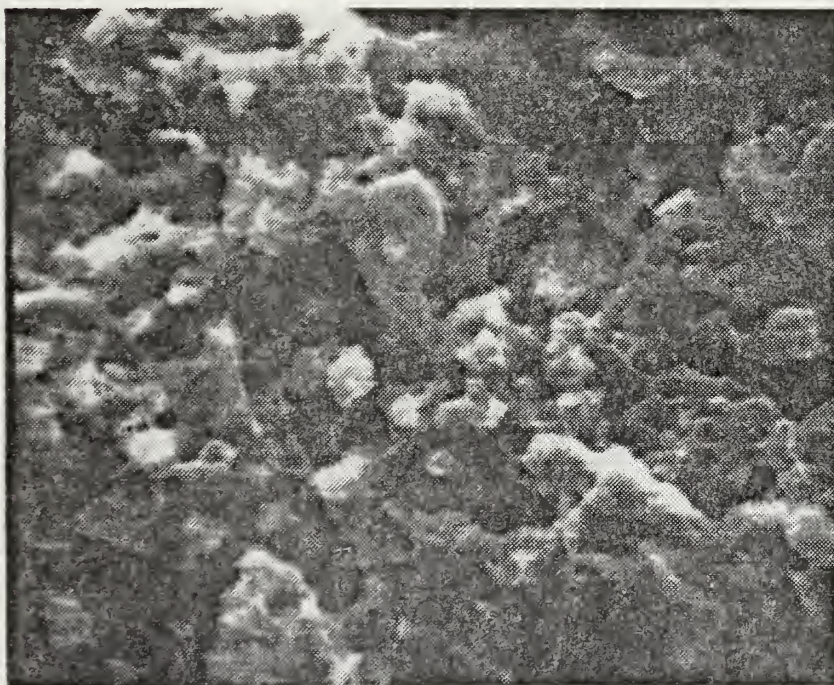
Higher magnification view of the area within the rectangle in fractograph Fig. 74 showing cleavage facets with dimples. X5000.
